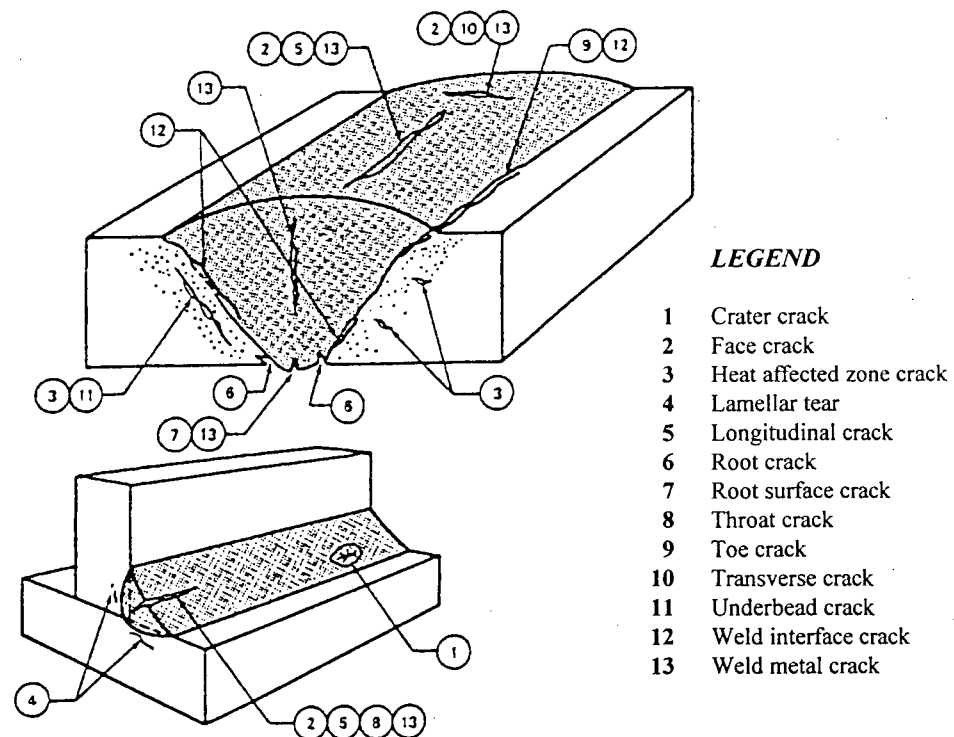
Types of Cracks Associated with Welding [11]
